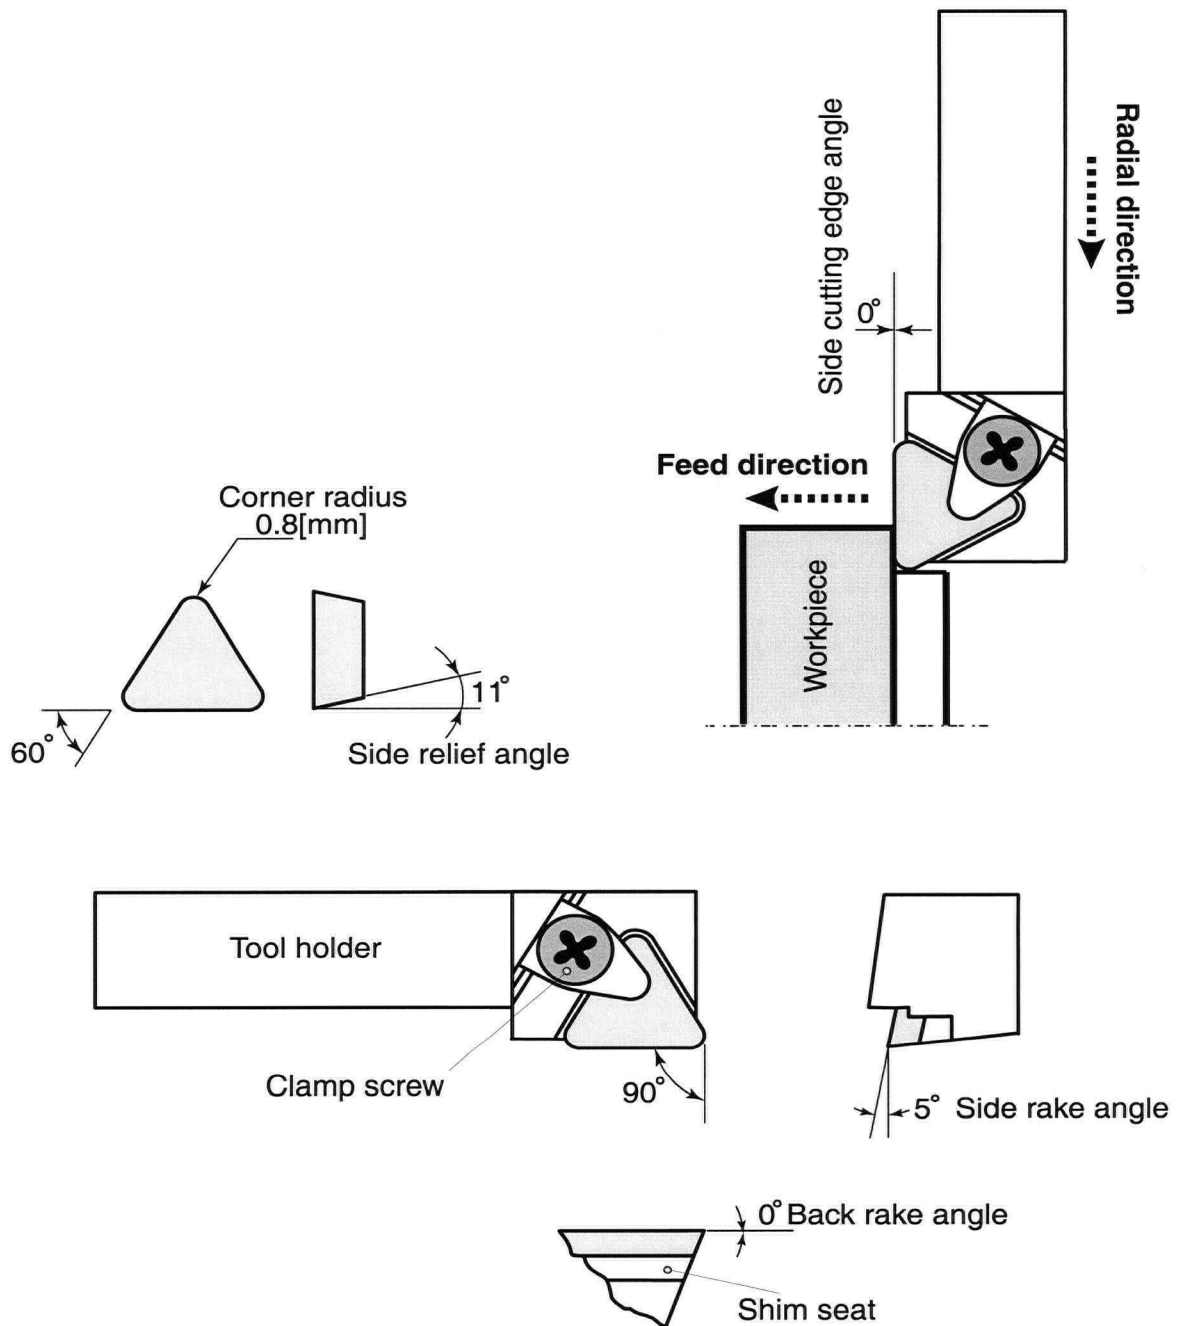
Valenite CTPGPL-16-3C tool holder and TPC-322J-VC2 insert
